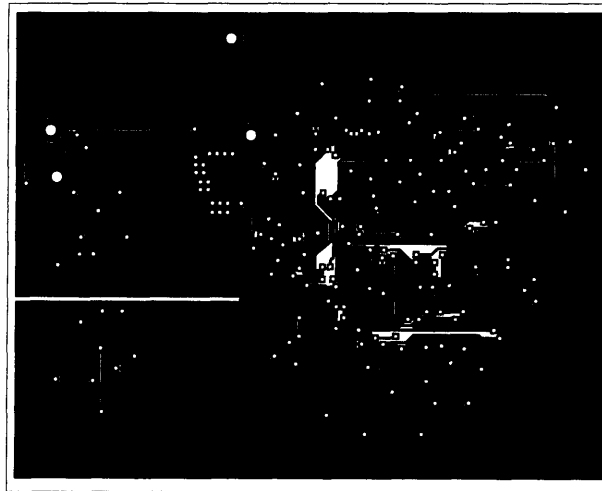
Bottom Layer of Prototype Printed Circuit Board
